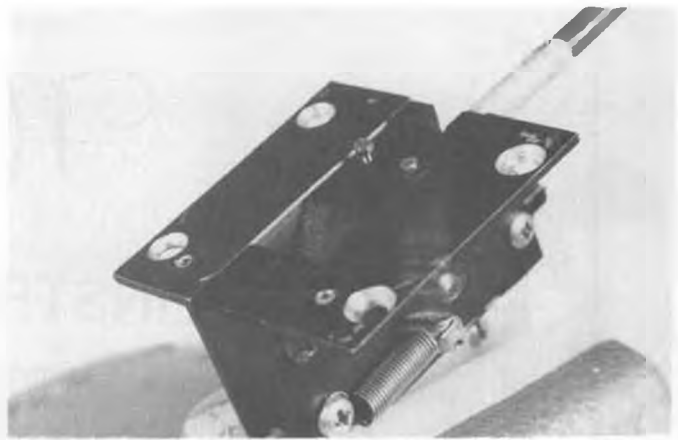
Hex-head brass bolts (0-80) self-threaded into drilled holes (No. 58 for 0 80 bolts).
